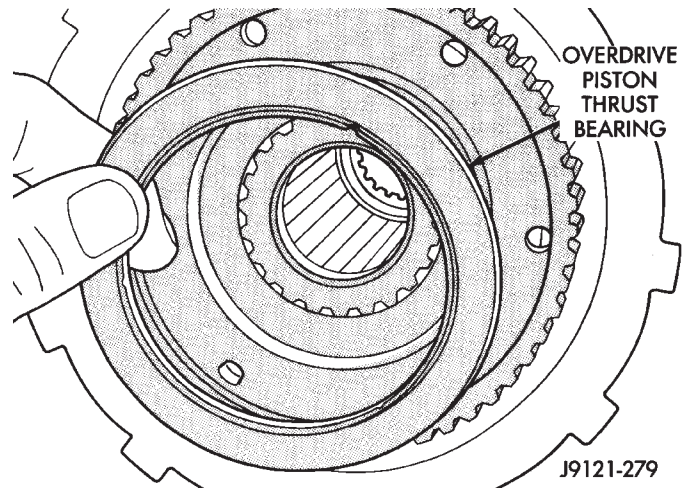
Removing/Installing Overdrive Piston Thrust Bearing
